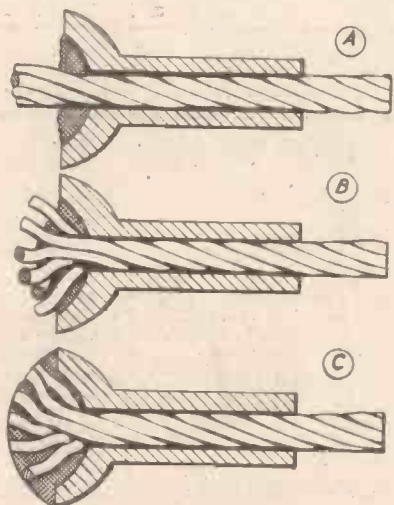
(A) cable is soldered into the nipple; (B) the end is splayed; (C) the whole is fixed and sealed with a blob of solder.
